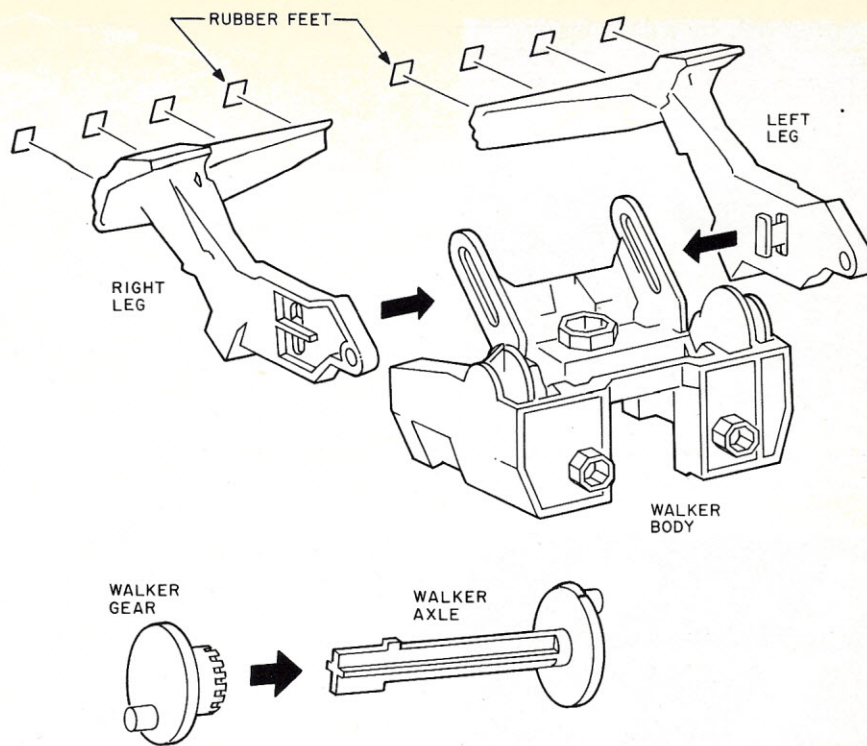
Assembly drawing showing the various pieces and assembly sequence for Robotix leg structure.
